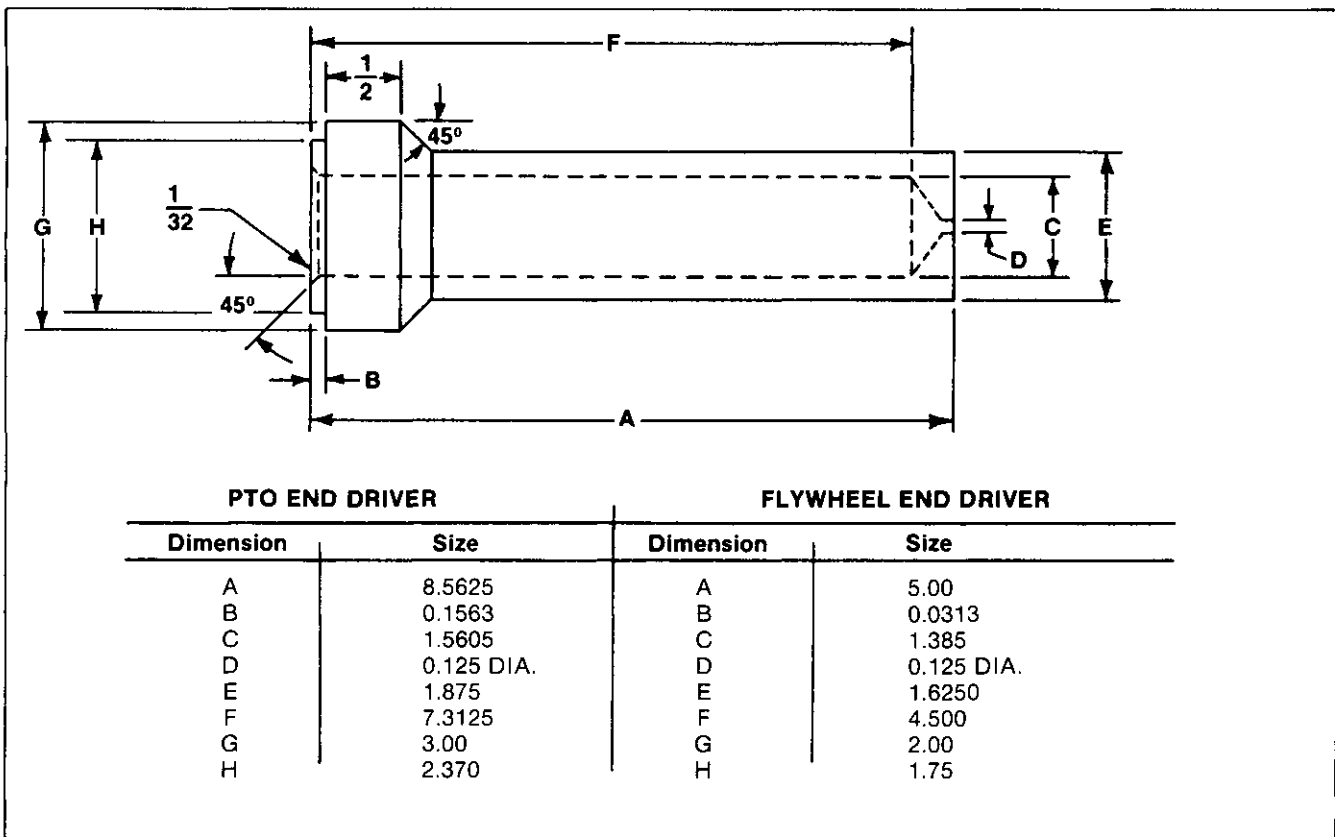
Seal Driver (P.T.O.)—Seal Driver (Flywheel)
